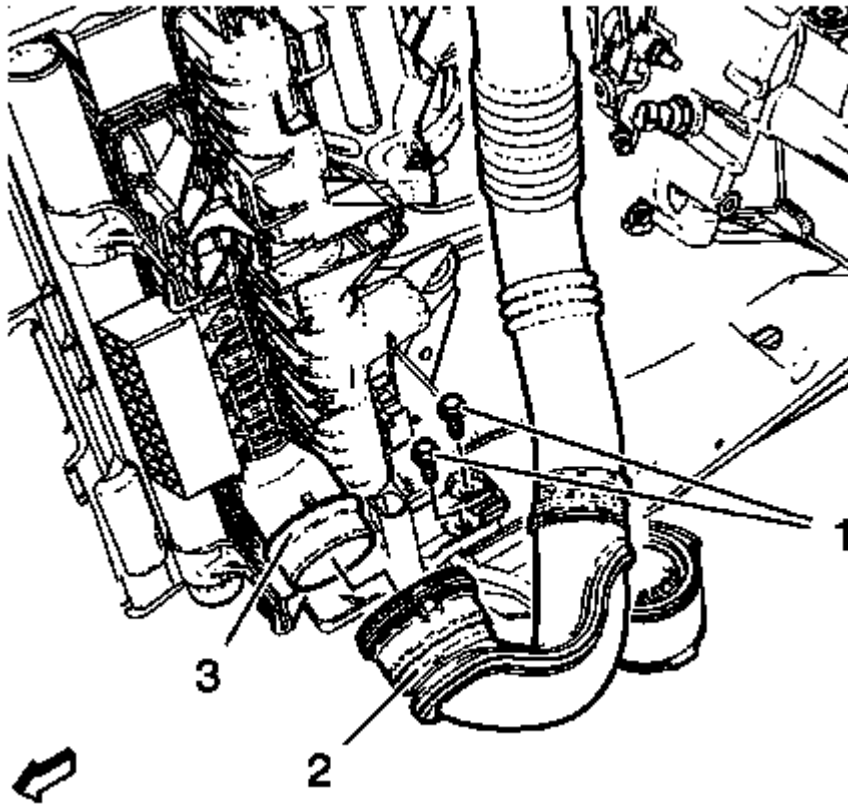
Charge Air Cooler Outlet Air Hose Bracket Bolt
